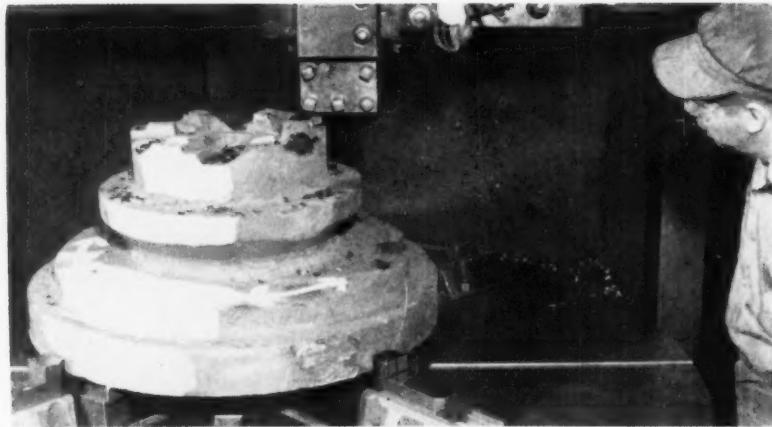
The Carbide Coordinator at Lewis Foundry makes periodical checks on the handling of tools by machinists. Much of the production at Lewis is large, heavy work such as this huge clutch. Facing the 6 teeth of this cast steel part presents a tough, interrupted cut calling for Carbolyte Grade 78C tools.
